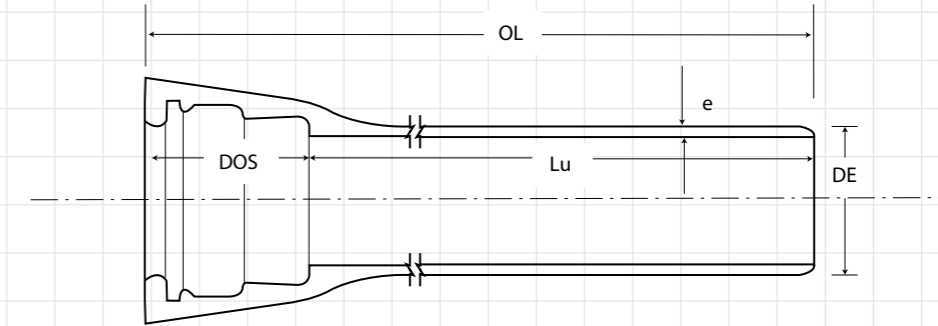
Dimension of Socket and Spigot pipe.
